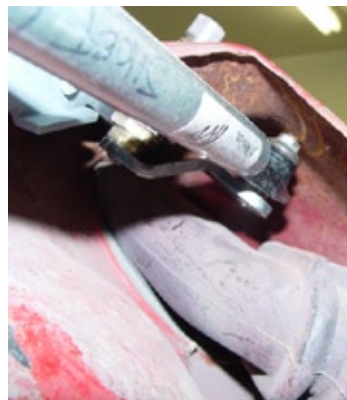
If the driver side, plastic air intake duct is causing interference with the driver side Pivot Shaft Assembly, remove it while installing the Wiper System
